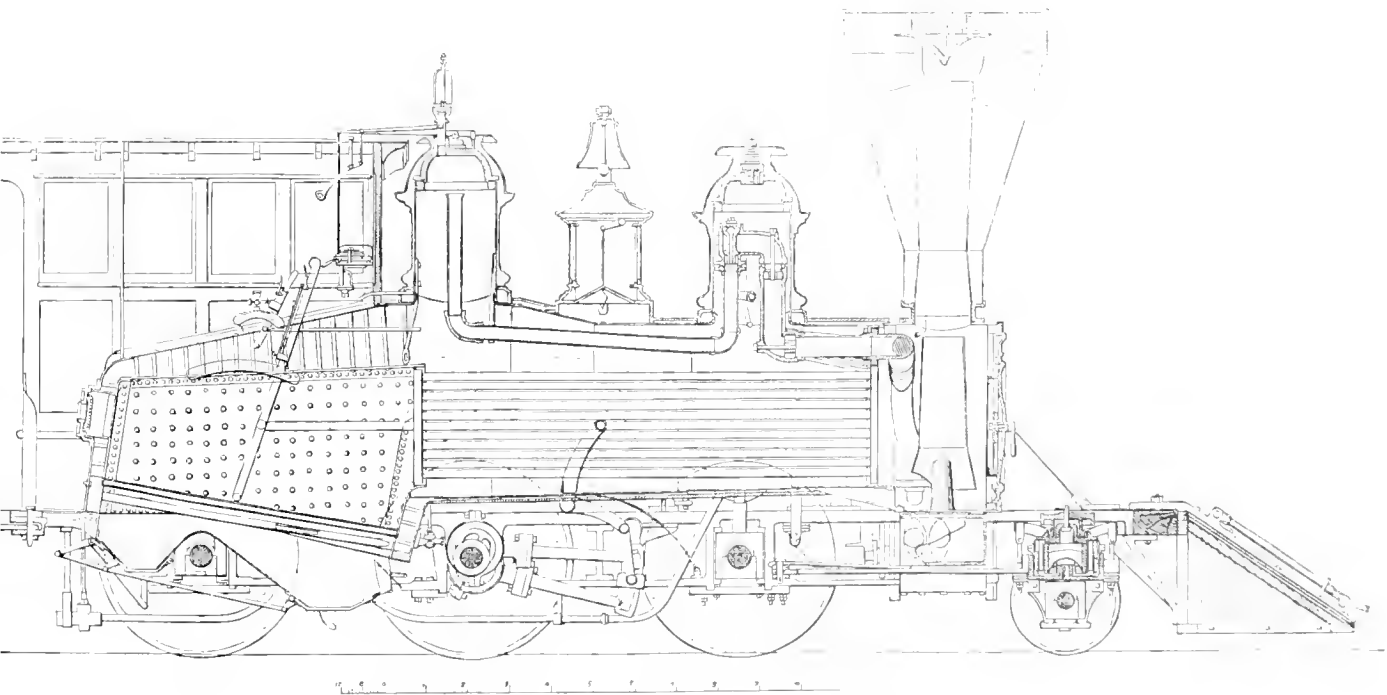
ONE OF SEVERAL MOGUL-TYPE LOCOMOTIVES built in 1865 by Danforth, Cooke & Company for the New York and Erie Railway, fitted with a Millholland boiler. (*Engineering*, May 11, 1866.)
